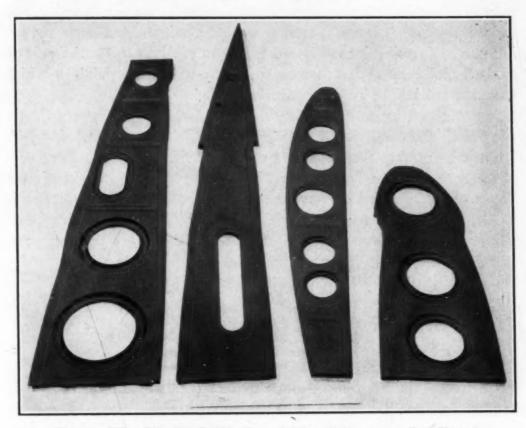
Wing Ribs Hot Rubber Formed from 0.032 and 0.04 J-1h Sheet.
